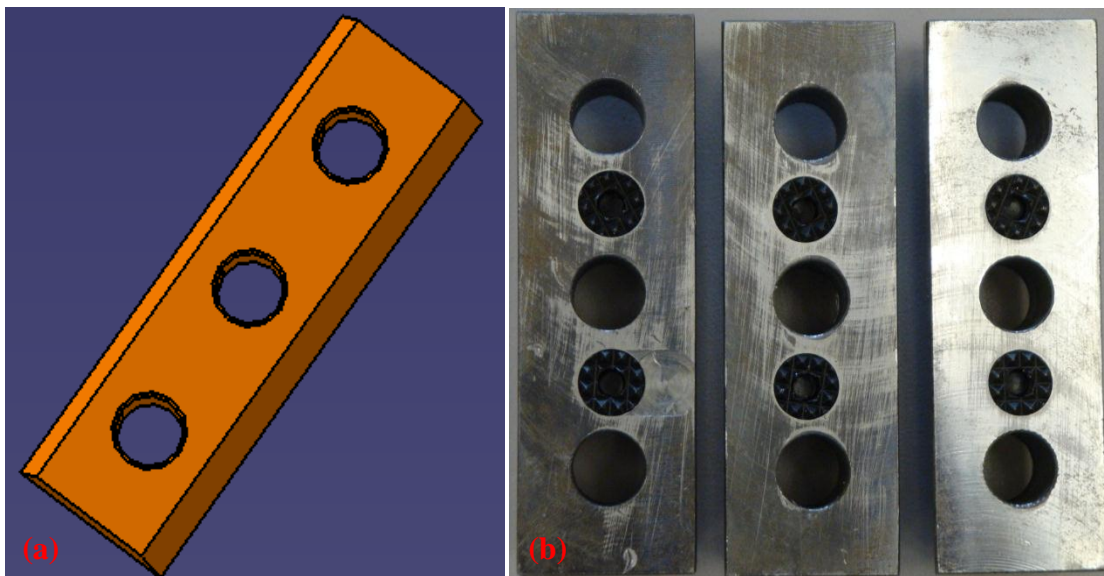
(a) CAD model of holding block (b) photograph of holding blocks of cyclic shear test fixture with inserted circular knurled blocks
